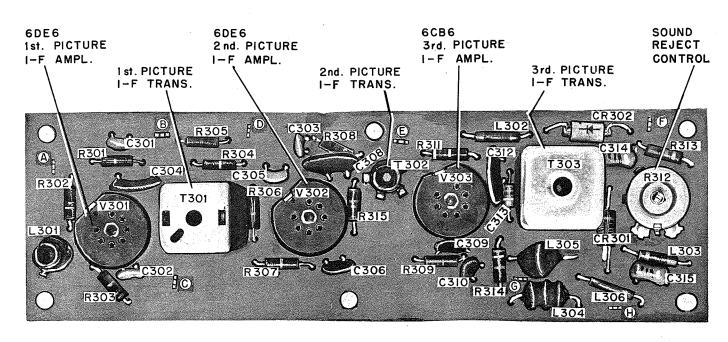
Top View, Printed Circuit Board PW-300, 1st, 2nd, 3rd Picture I-F—CTC5, CTC5N.
